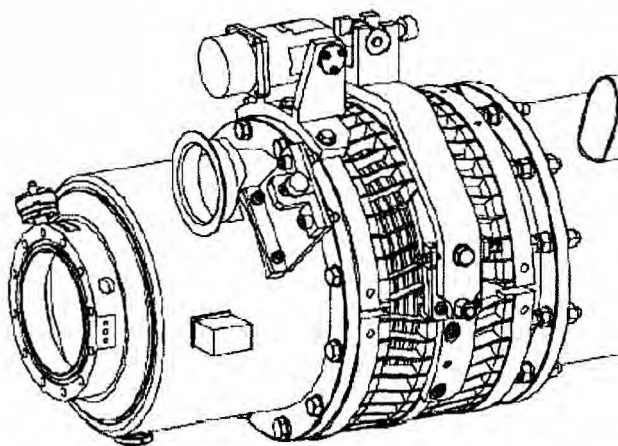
3d draft of the blade-tuner mounted on the He vessel
